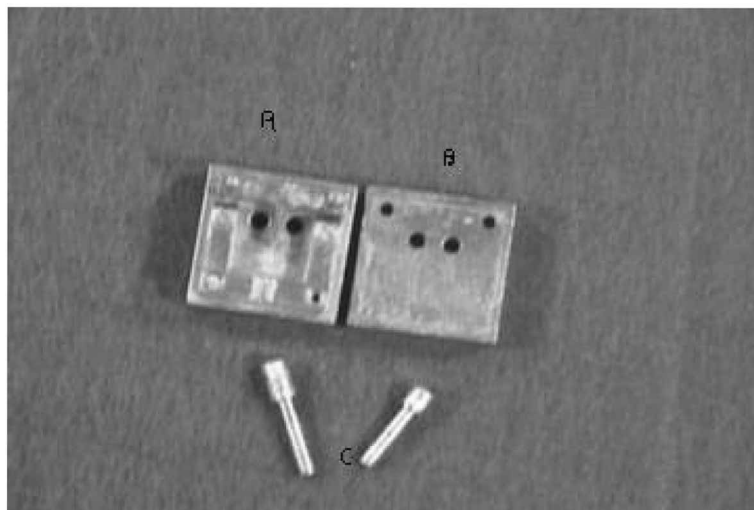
A photograph representing the mold to produce the compact test specimens. A: Base containing the mold cavity B: Cover, which fit over the base C-Two circular rods.
